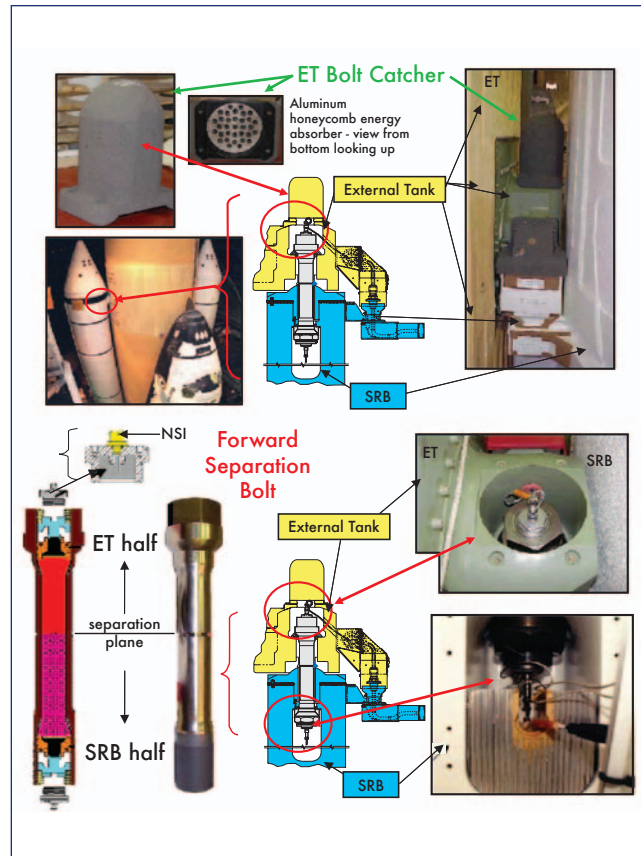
Details of SRB/ET forward separation bolt catcher assembly.
